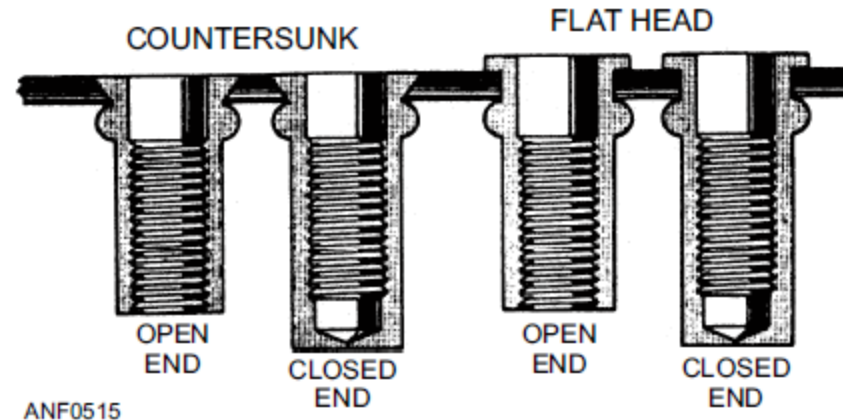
Sectional view of rivnut showing head and end designs.
